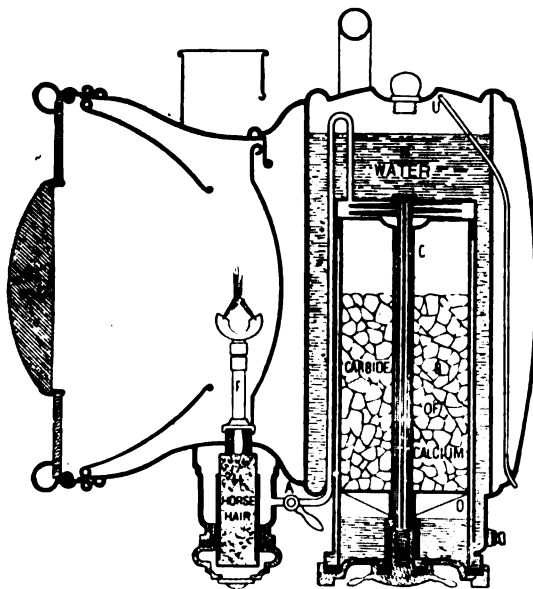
The "Ducellier" Head-Light.—Sectional drawing through one of the self-contained lamps, in which the generator is situated immediately behind the burner-chamber.
